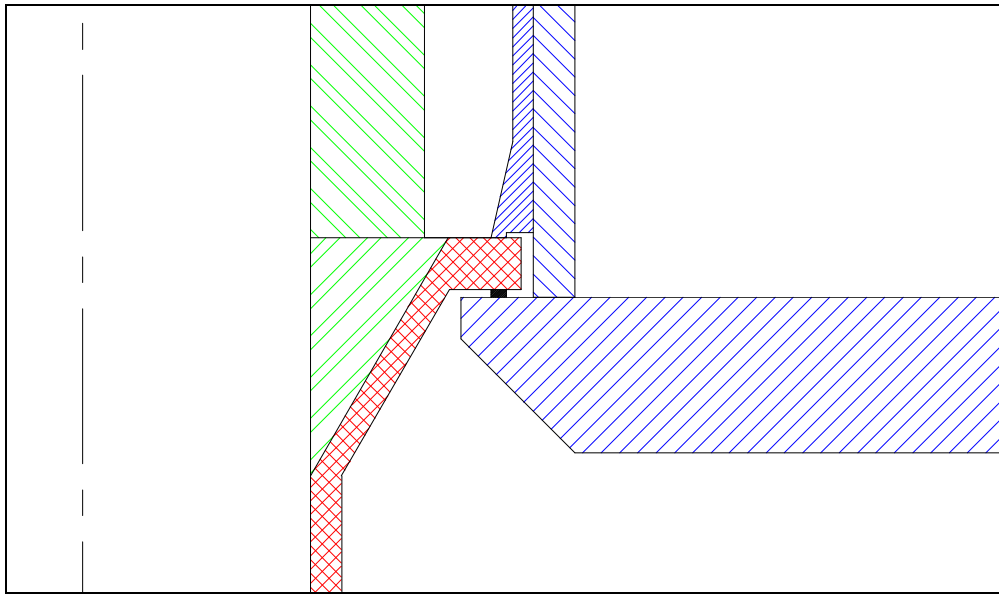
Schematic representation of the tube-to-tubesheet final joint
